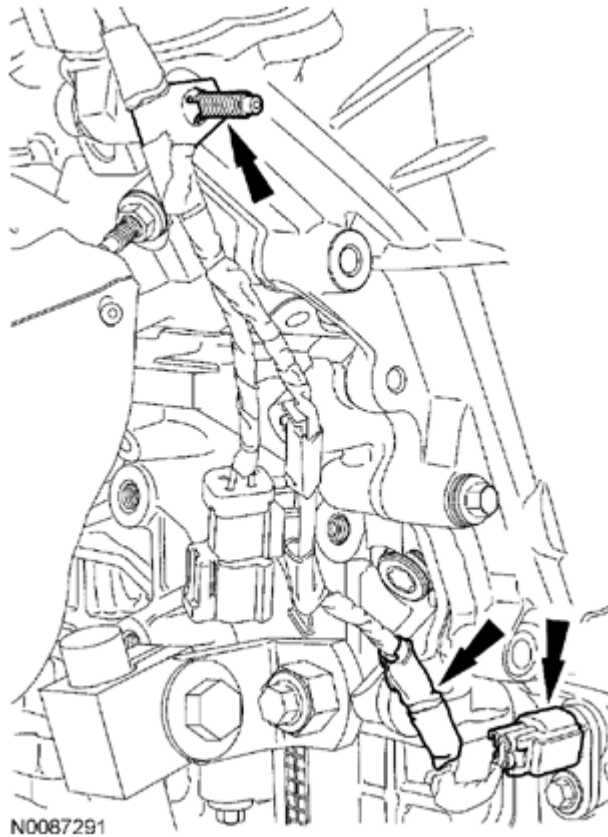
Locating Crankshaft Position Sensor Electrical Connector And Wiring Harness Retainers
